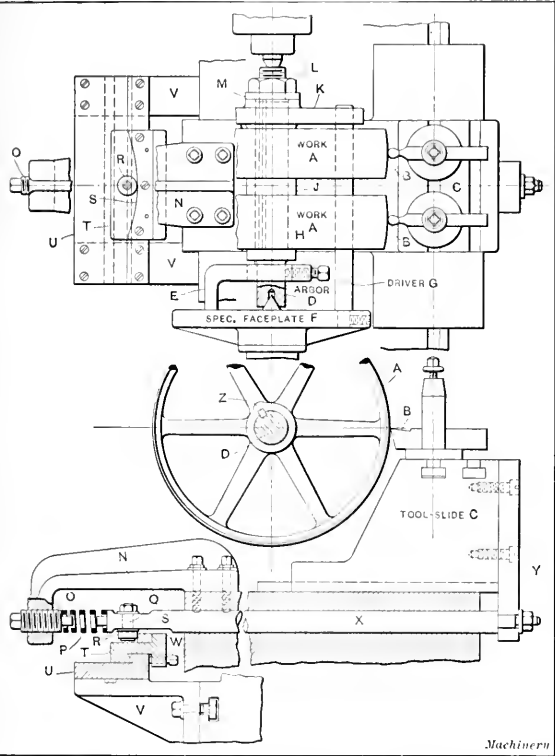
Pulley Crowning Attachment for Engine Lathe
